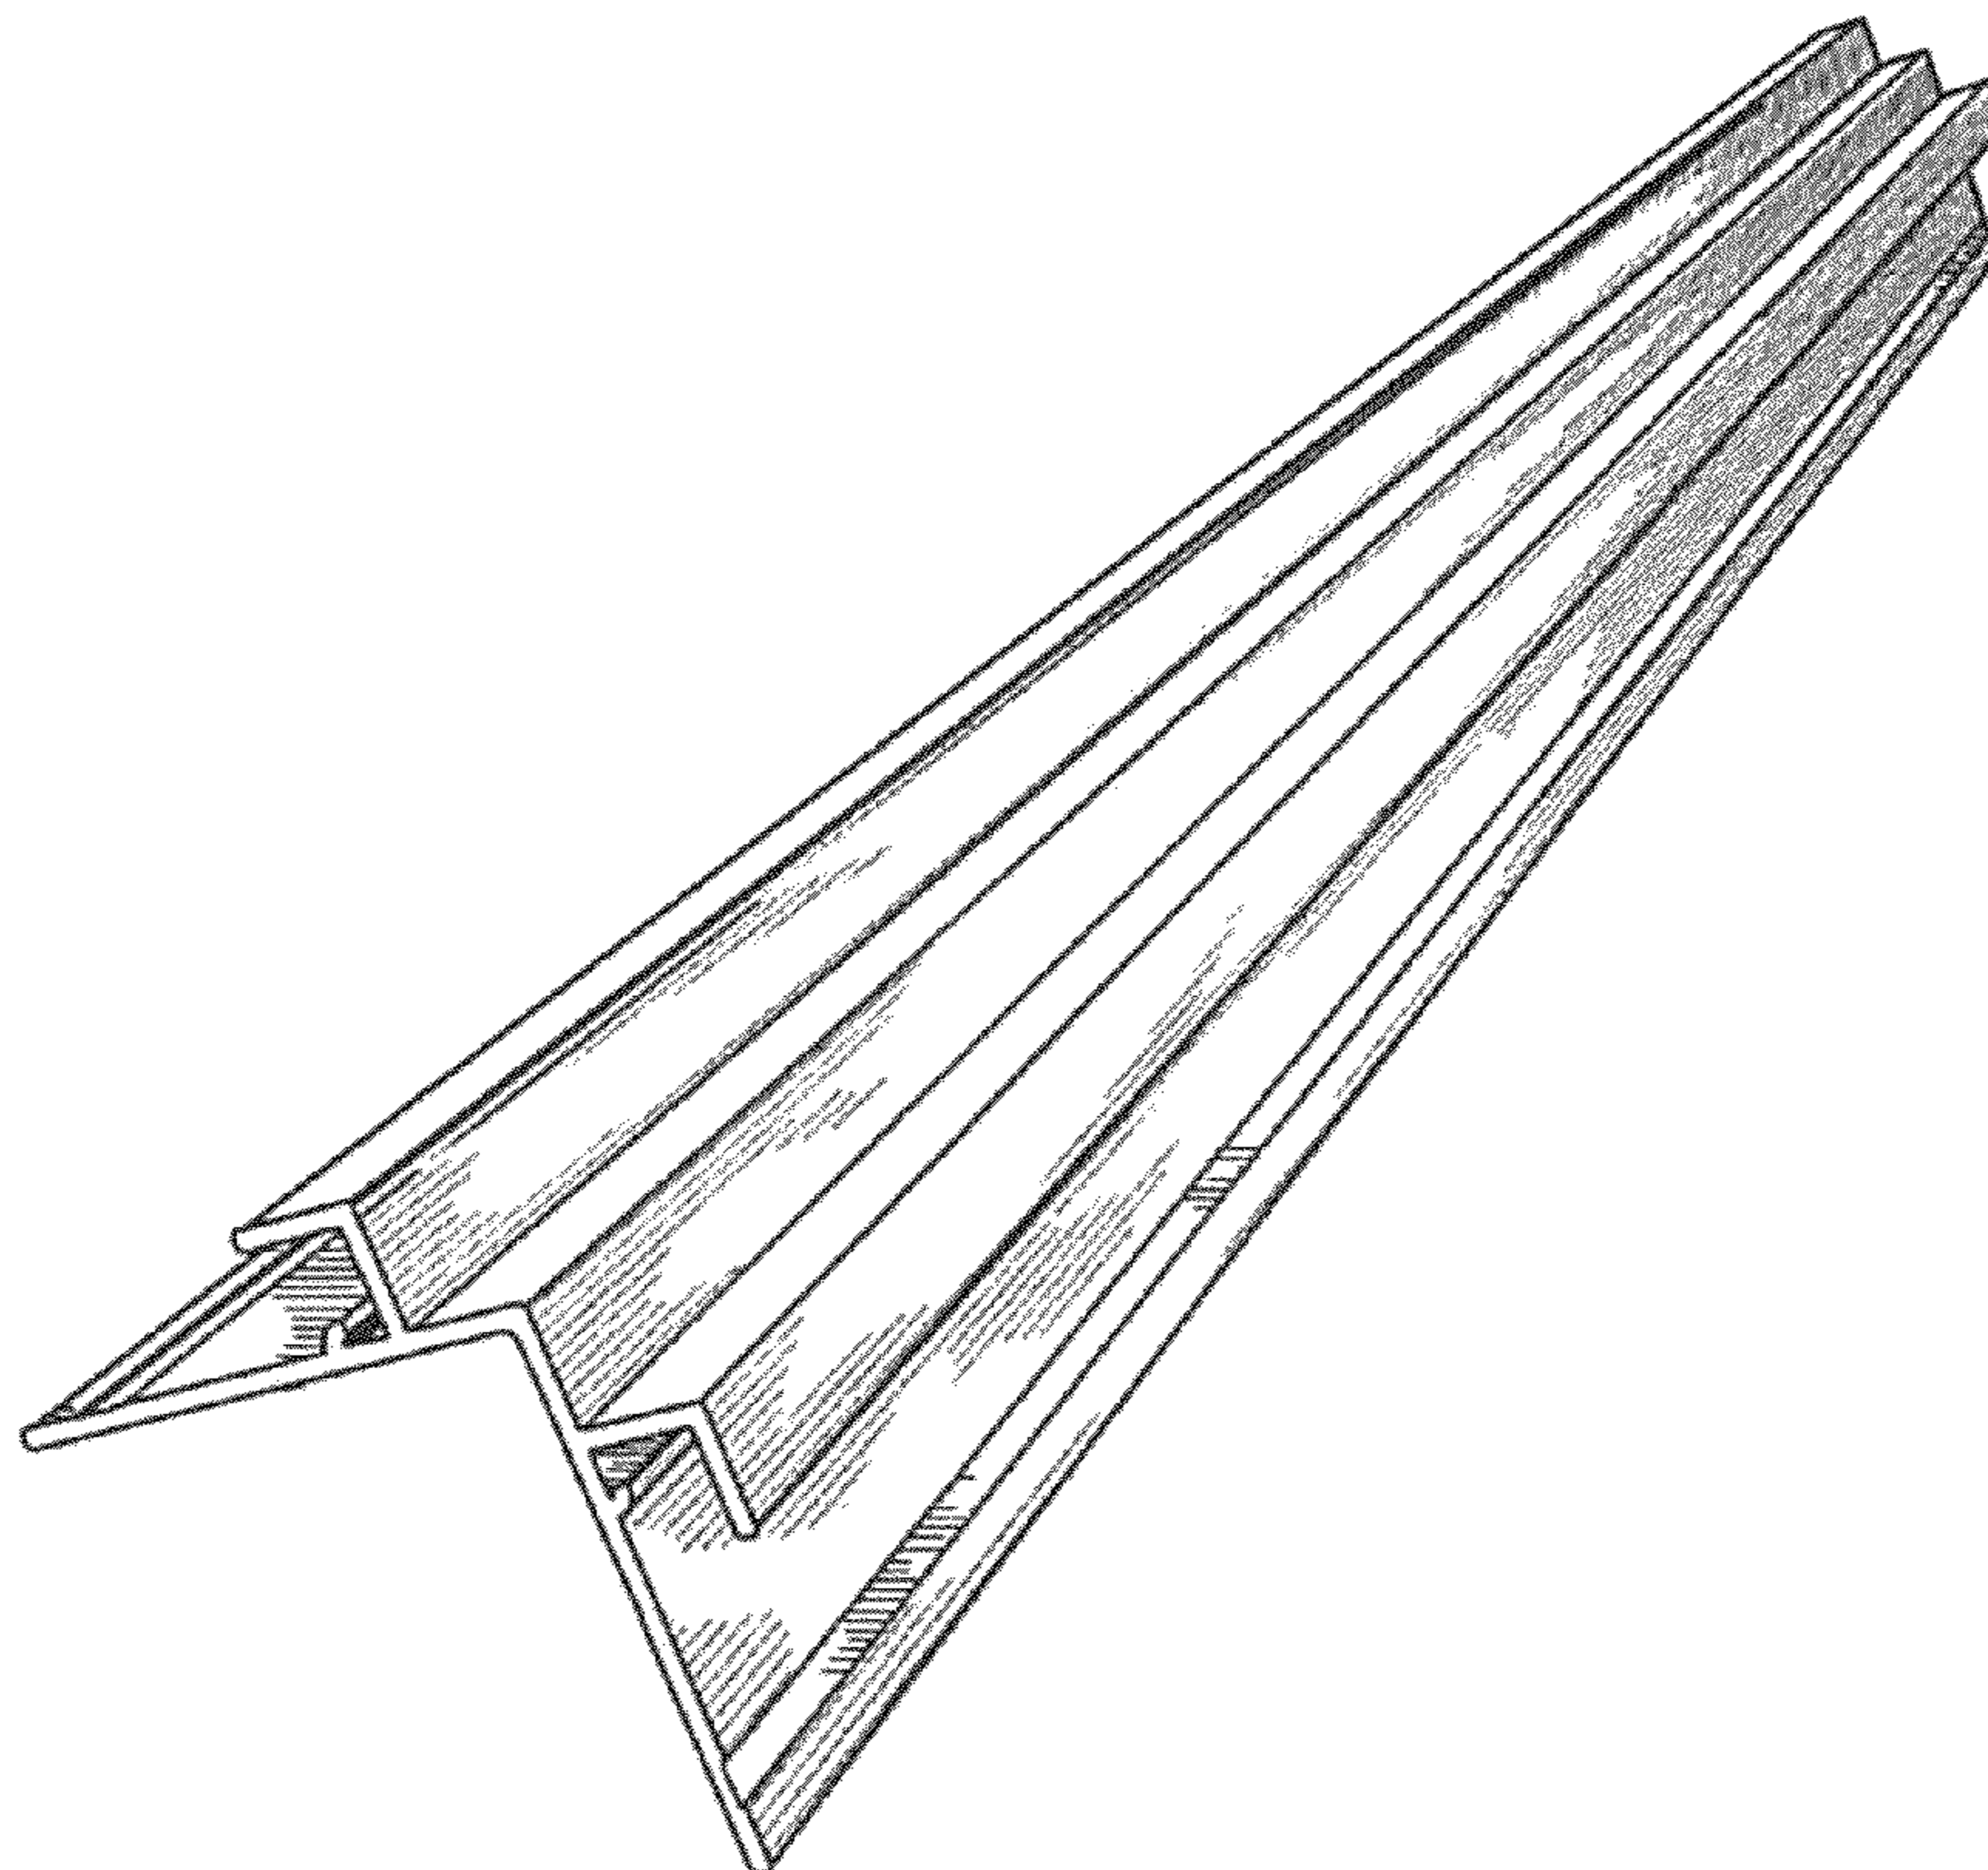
illustrates a perspective view of a trim reveal extrusion of indeterminate length comprising a new design; and, FIG. 2 is a detailed end elevational view thereof at a larger scale.
